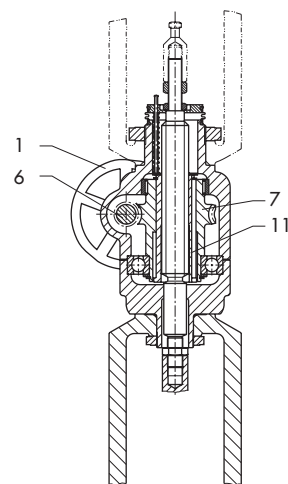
Sectional drawing of Type 3273 Side-mounted Handwheel, for up to 60 mm rated travel
